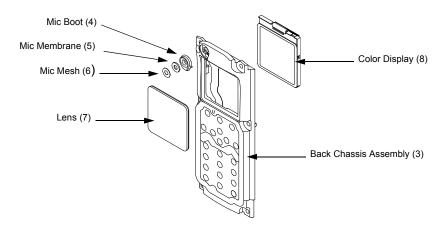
Back Chassis Assembly (Dual Display Versions)
